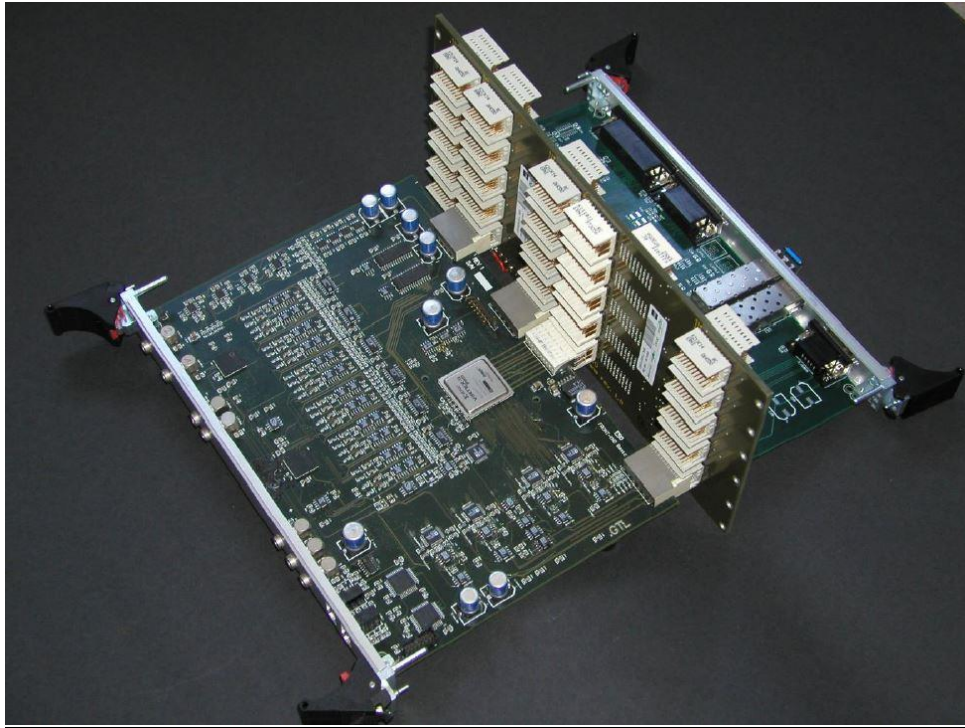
NGC system with Basic Board, Backplane and Transition Board (VIS arm)
